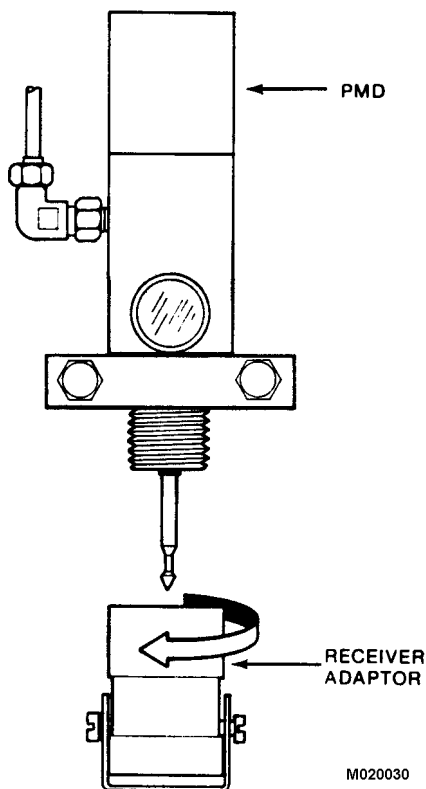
RECEIVER/ADAPTOR REMOVAL
